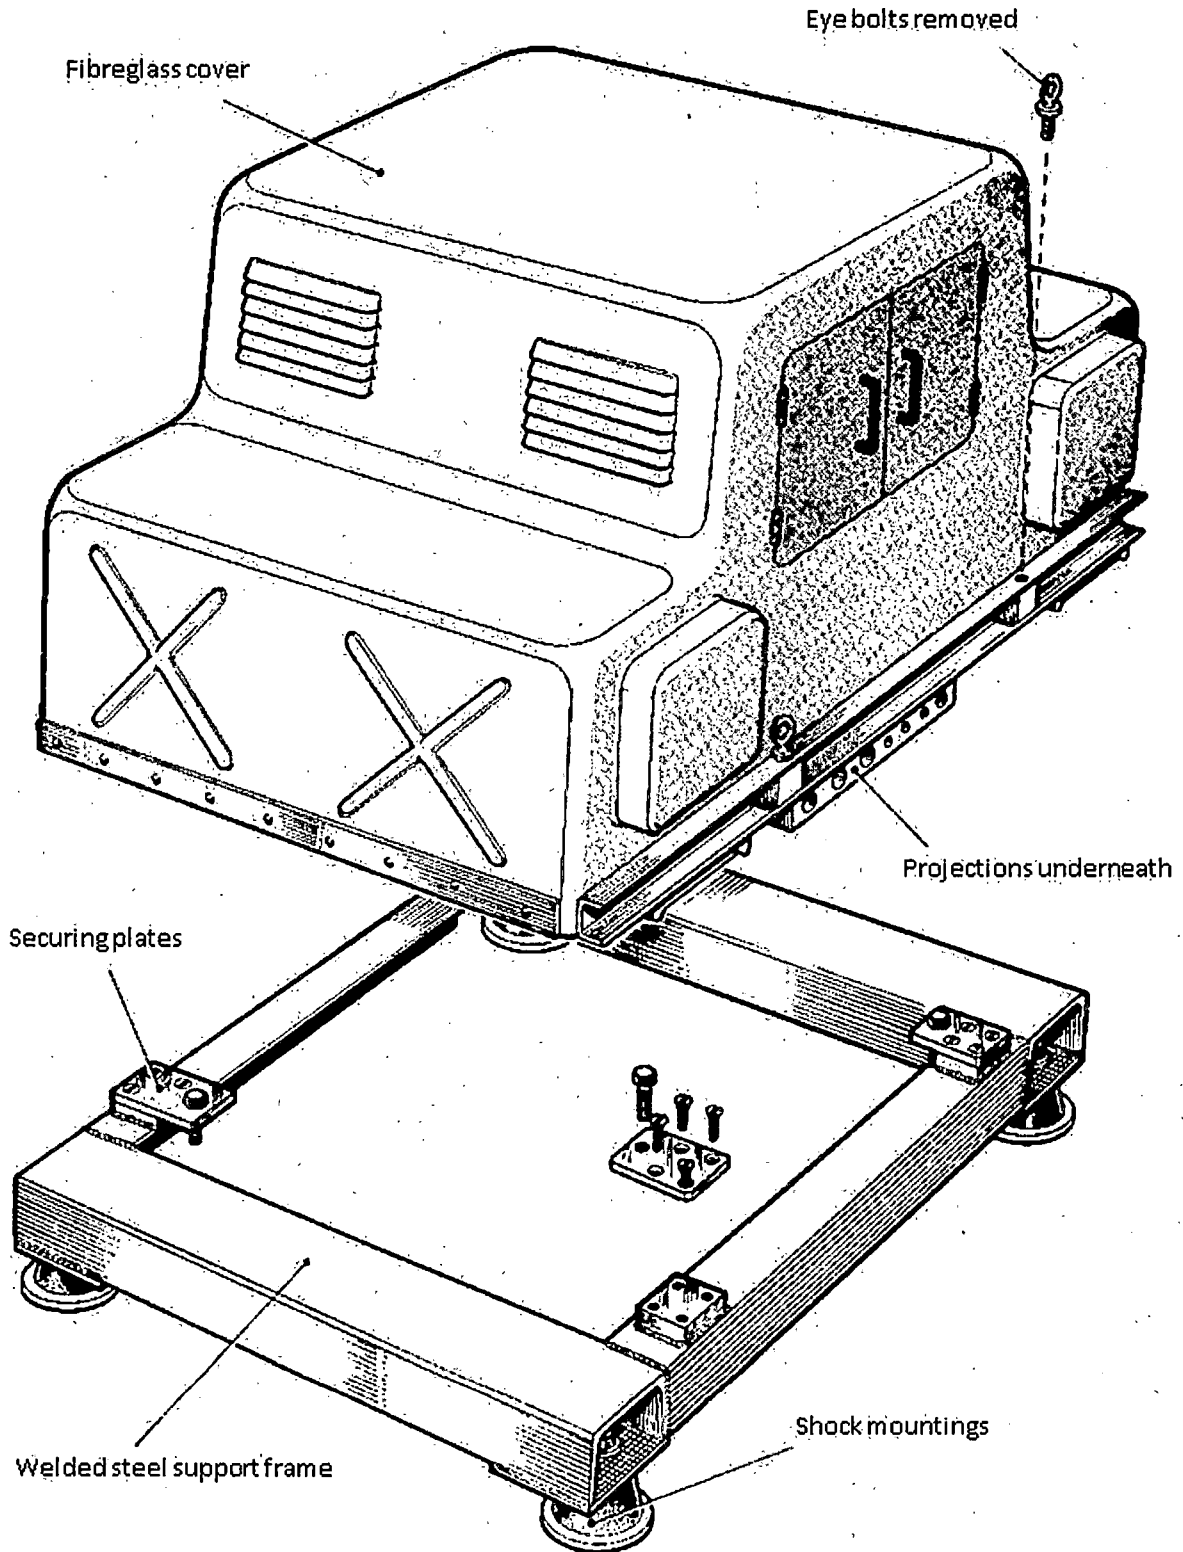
A Method of Locating a Heavy Fragile Item and Supporting on Shock Mountings
